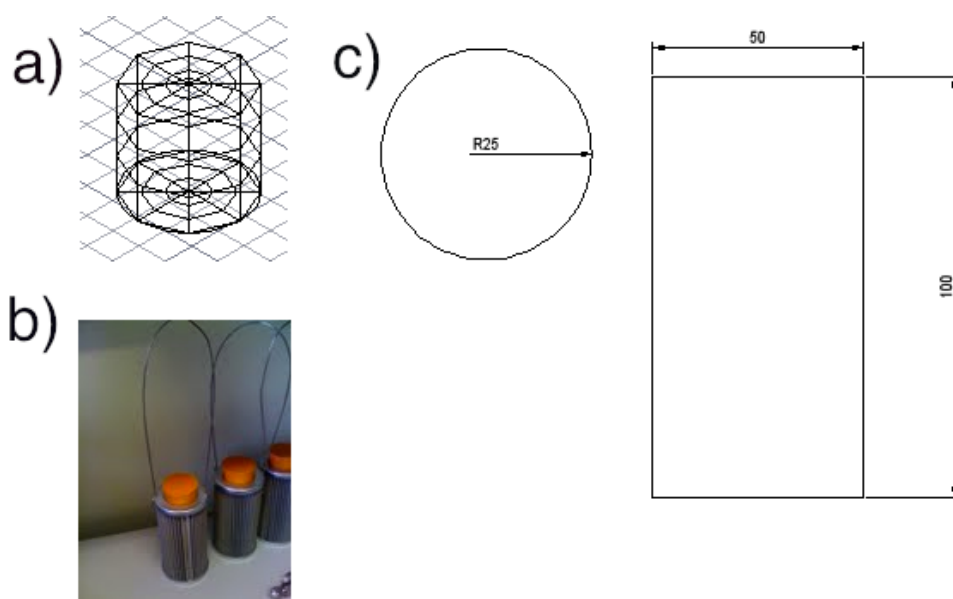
a) 3D.AutoCAD® drawing of baskets, b) fabricated stainless steel baskets, c) technical drawing with dimensions (in mm).
